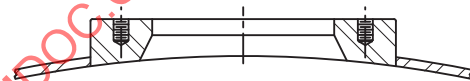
Agitator Mounting Flanges
